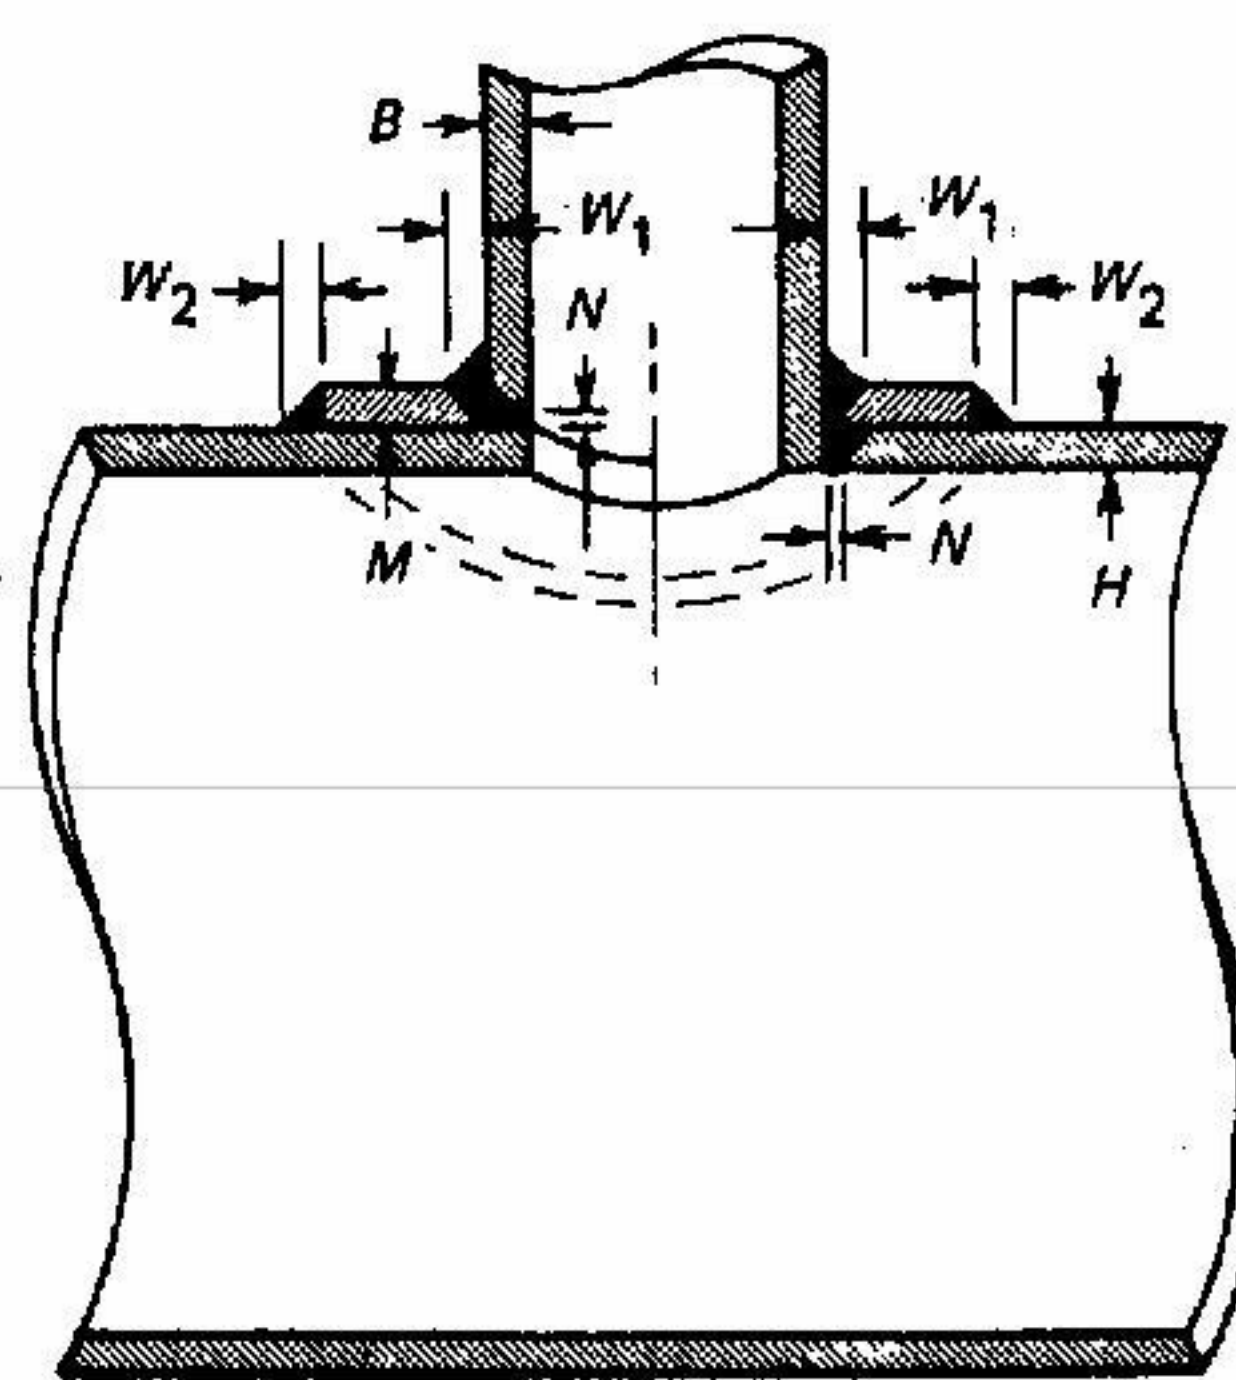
Welding details for opening without reinforcement other than that in header and branch walls
